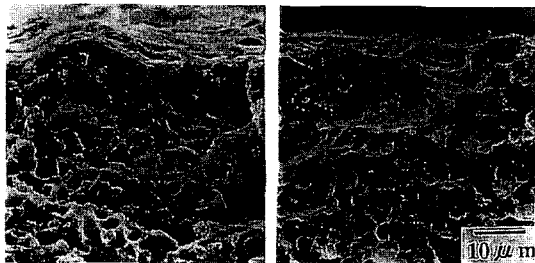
Fractured surfaces of the hub (left) and the scroll-shaped plate(right) tops illustrated by SEM.
